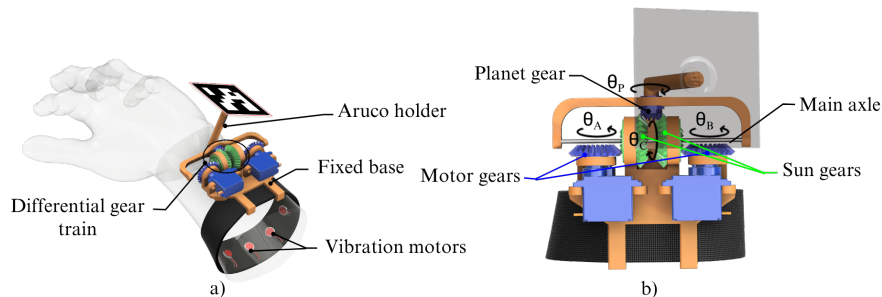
3D CAD model of the MoveTouch wearable device.
